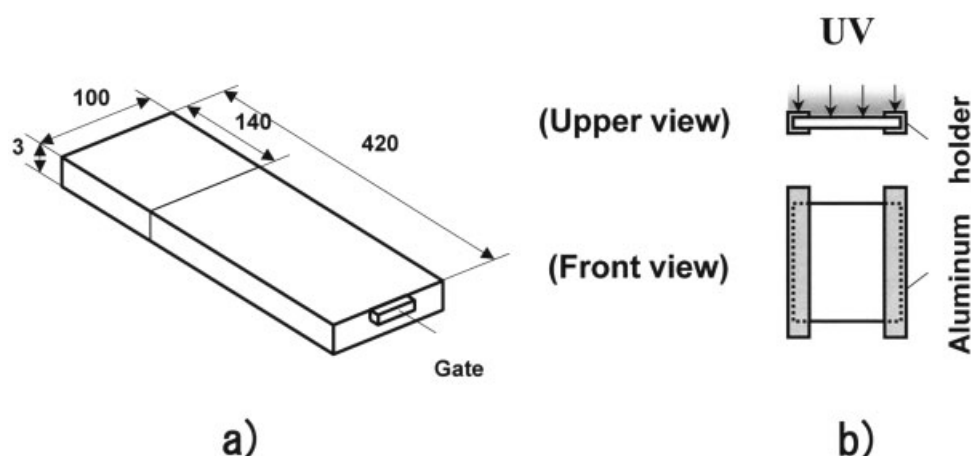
Schematic drawings of specimens used in this study: (a) dimensions (mm) of the injection plate and (b) attachment state for UV irradiation.
